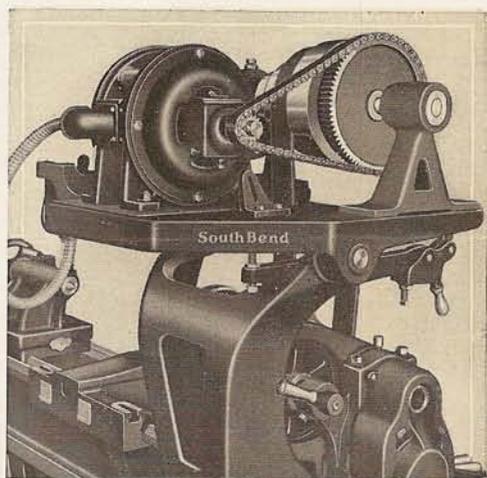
Silent Chain Mechanism with Gear Guard Removed Showing How the Motor Drives the Spindle Cone
